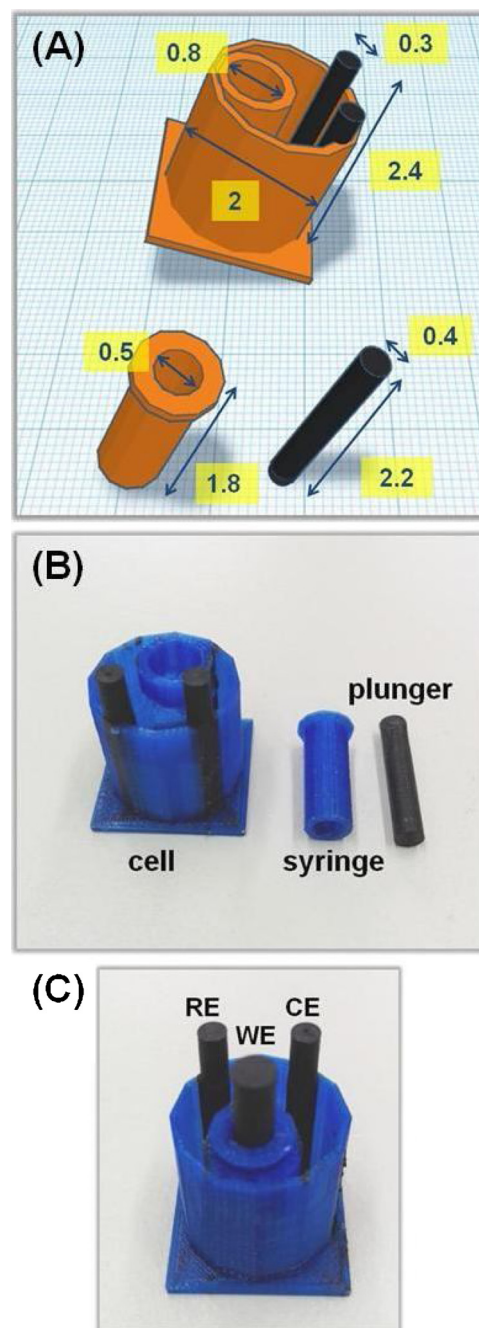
(A) The dimensions of the 3D-printed lab-in-a-syringe cell (in cm). (B) Photograph of the main parts of the device. (C) Photograph of the complete device.
